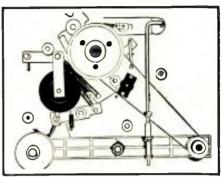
The rewind spindle in the lower right is driven by means of a chain belt from the motor in the system shown here.
